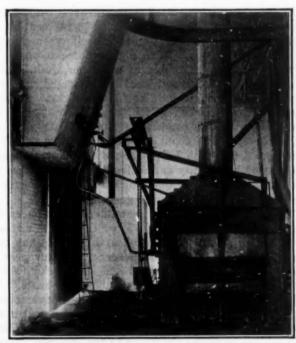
VIEW OF A SMALL FORGING FURNACE WITH PULVERIZED COAL BURNER
